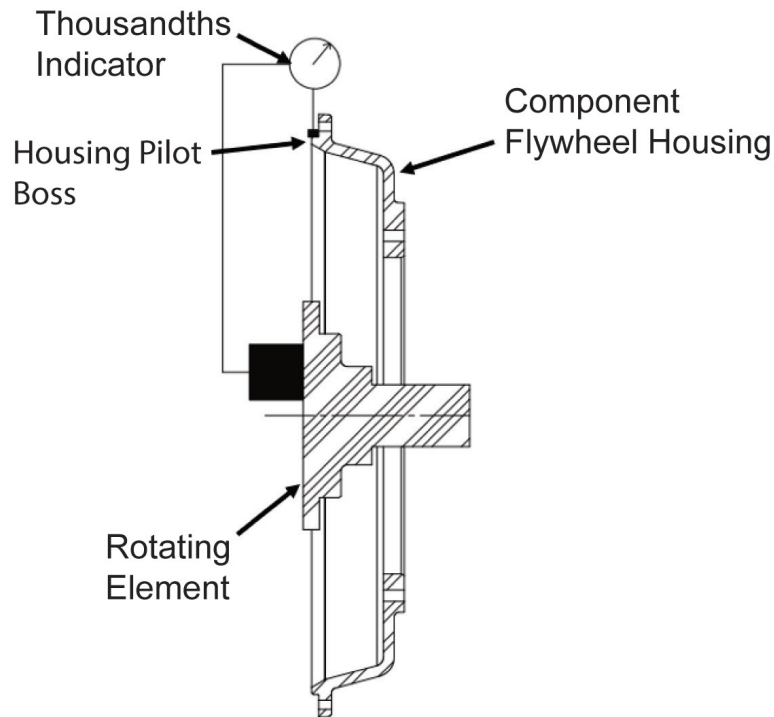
Checking Mating Driven Component Housing Pilot Boss Eccentricity
